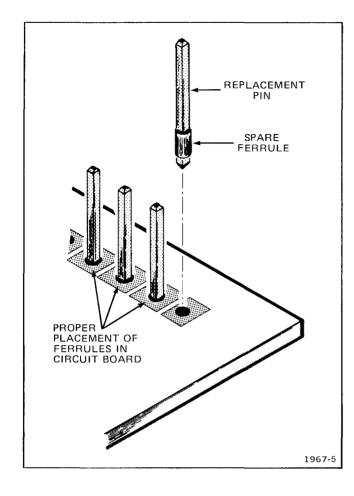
Exploded view of circuit-board pin and ferrule.
